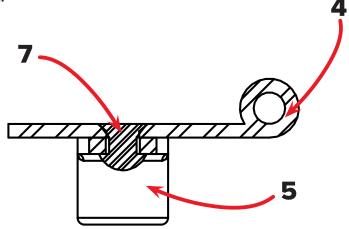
ANCHOR NUTS RIVETED ON THE 1/2 HINGE
